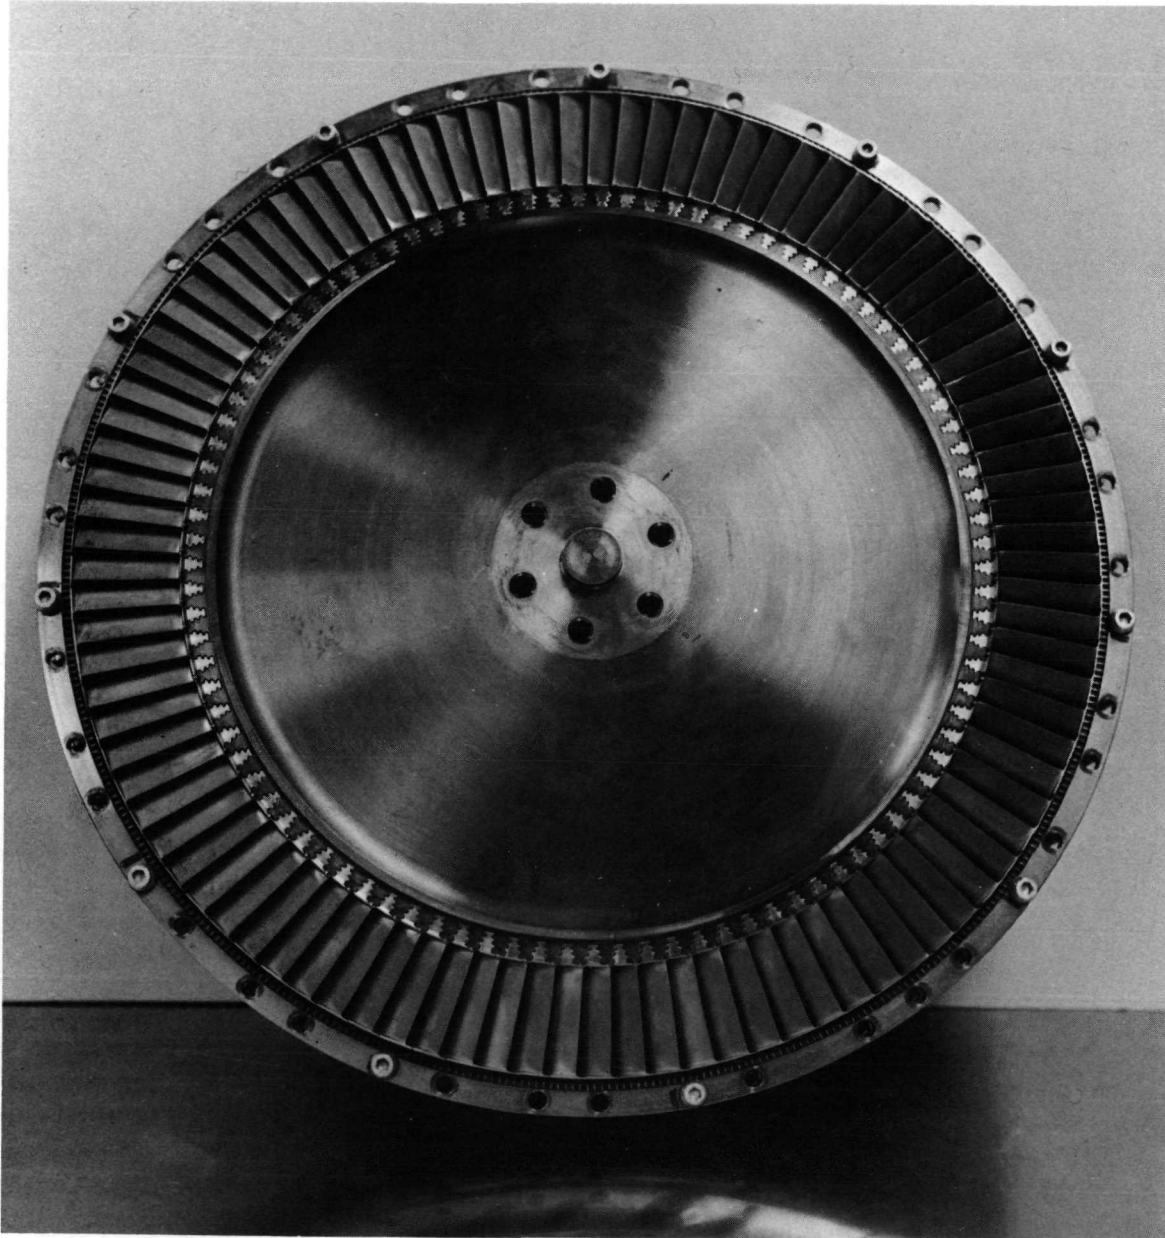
PHOTOGRAPH OF TURBINE WHEEL ASSEMBLY
